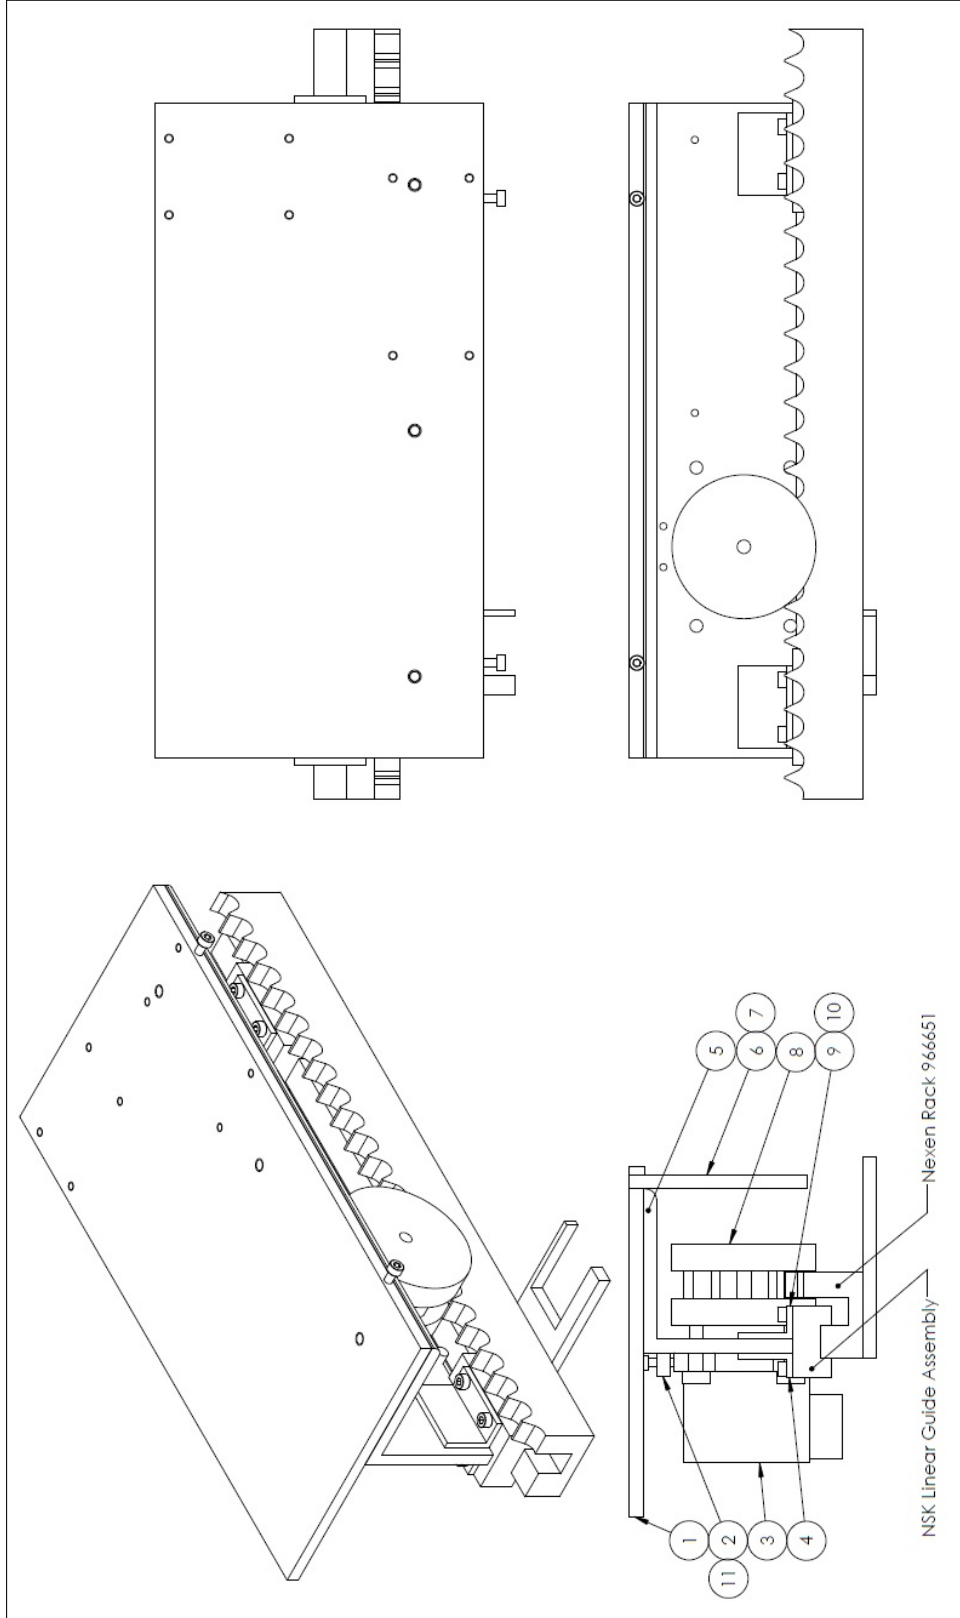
Mobile Base - Overview: ① Foundation Plate, Fig. A.5; ② Pinion Adjust, Fig. A.6; ③ Harmonic Drive Servo Motor FHA-11C-100-US200-E; ④ Rear Mounting Foot, Fig. A.8; ⑤ Mounting Angle, Fig. A.7; ⑥ Pinion Cover, Fig. A.10; ⑦ M4x10mm SHCS; ⑧ Nexen Pinion 966687; ⑨ Front Mounting Foot, Fig. A.9; ⑩ M4x10mm SHCS; ⑪ M4x15mm SHCS.
